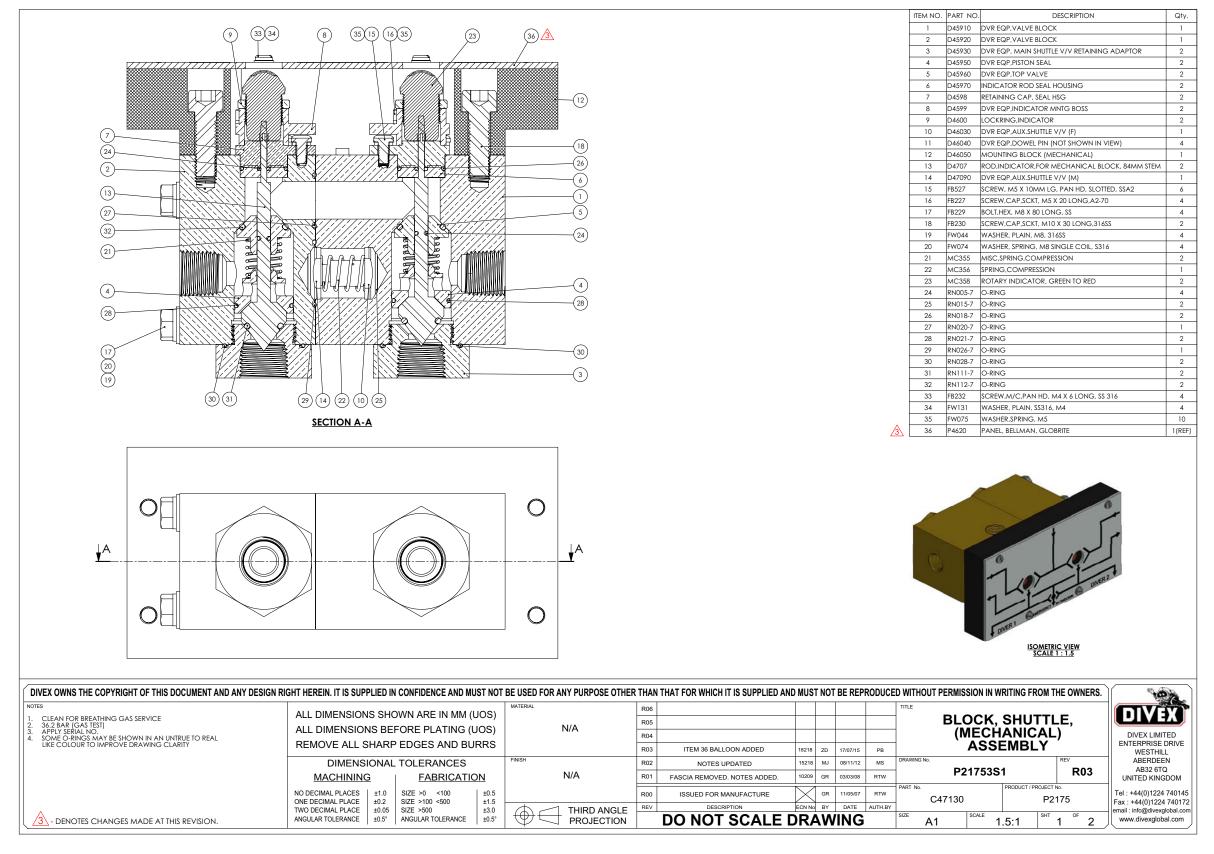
Shuttle block mechanical assembly (Drawing P21753S1)
